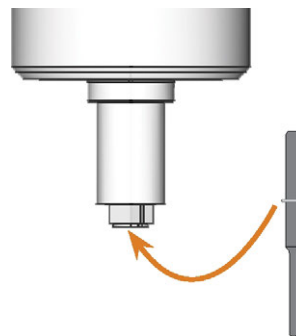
INSERTING THE TOOL INTO THE COLLET CHUCK
